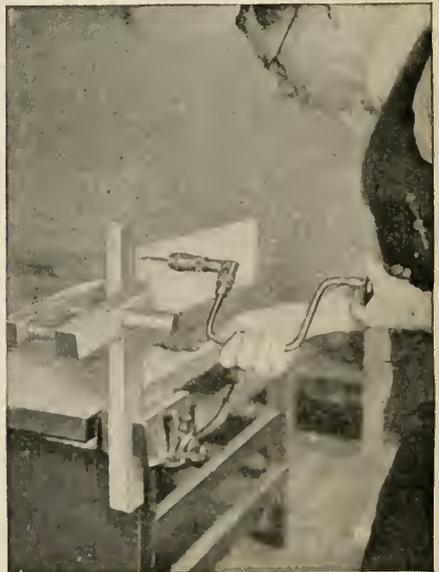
Before driving screws, it is of primary importance to know what size holes to bore for them.
